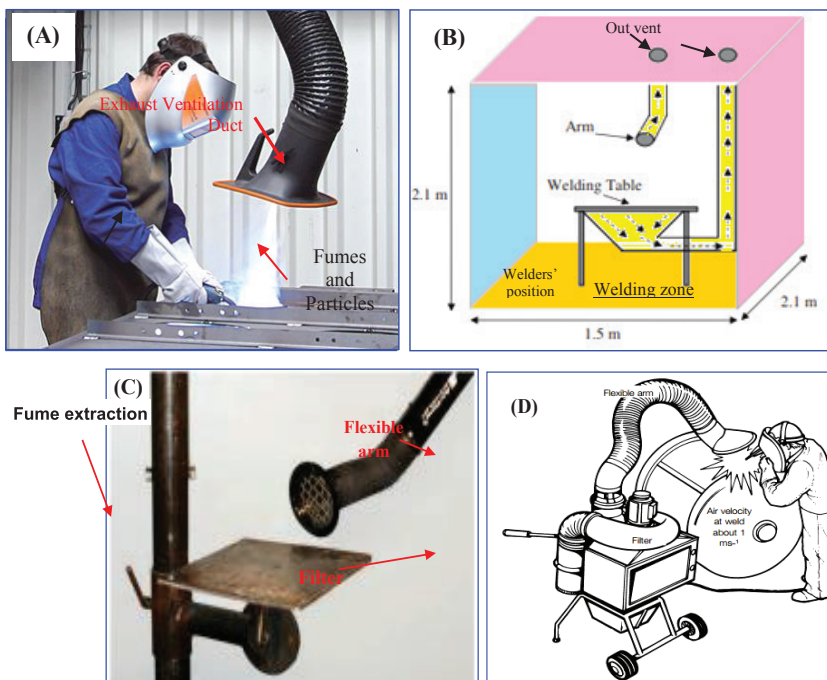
Ventilation setup: (A) Modified welding room with duct; (B) Welding table with modified ventilation setup; (C) Exhaust pickup arrangement; and (D) Mobile fume control setup.
